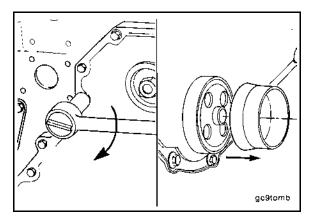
TIGHTEN THE FRONT COVER CAPSCREWS
